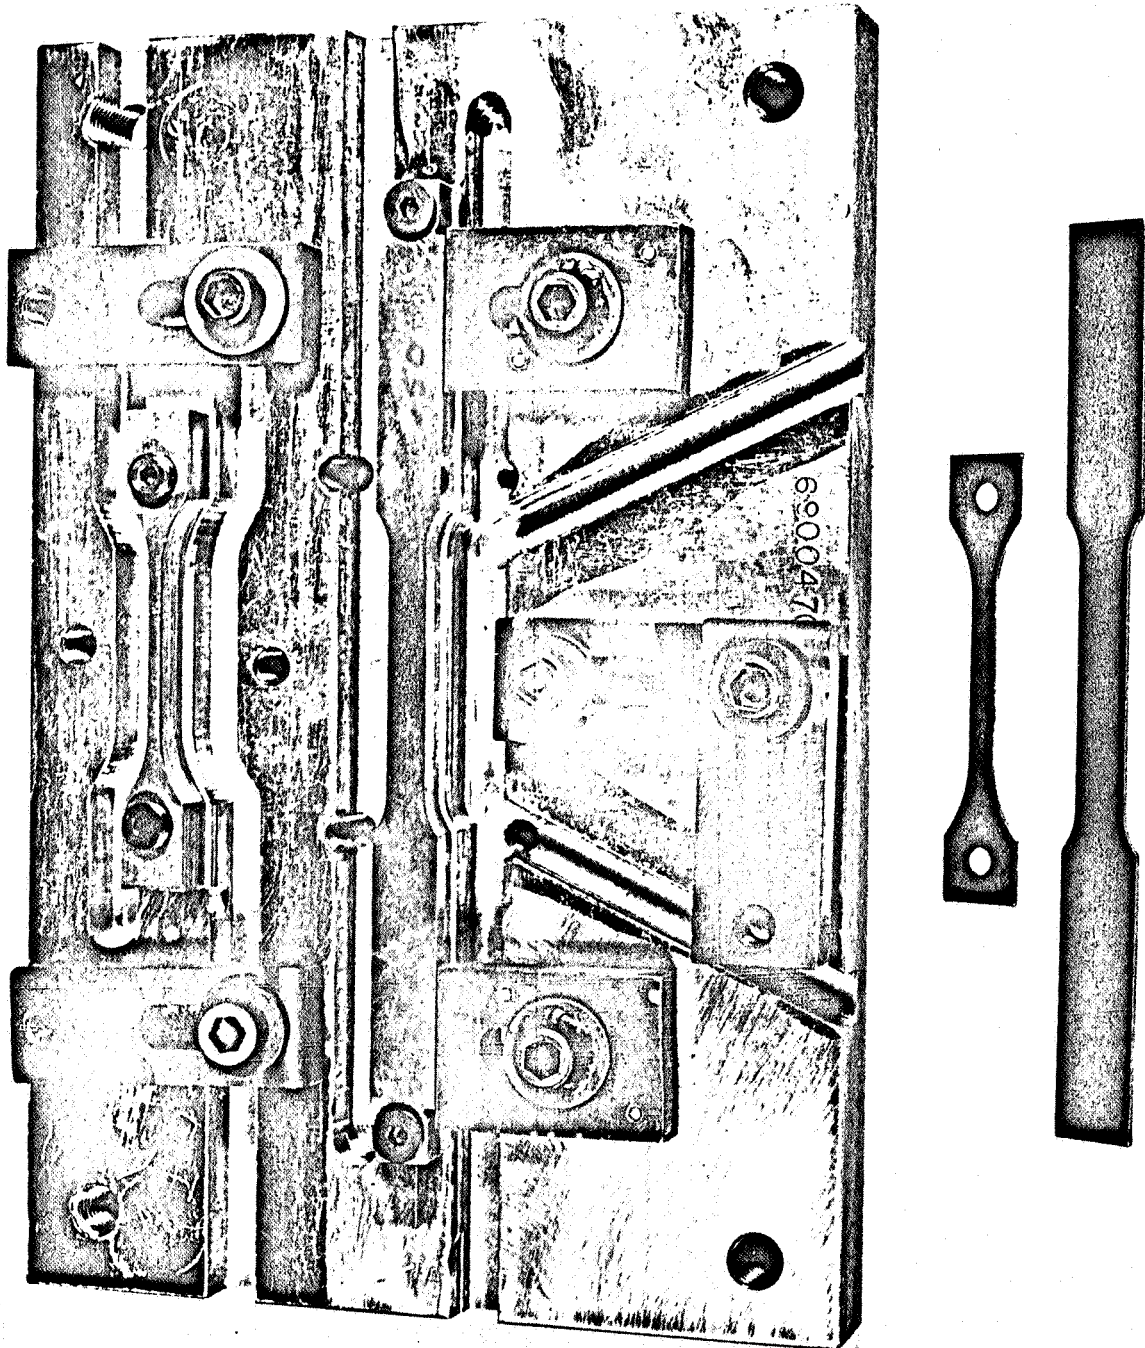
Standard Router Fixture for Preparing Tensile Specimens
